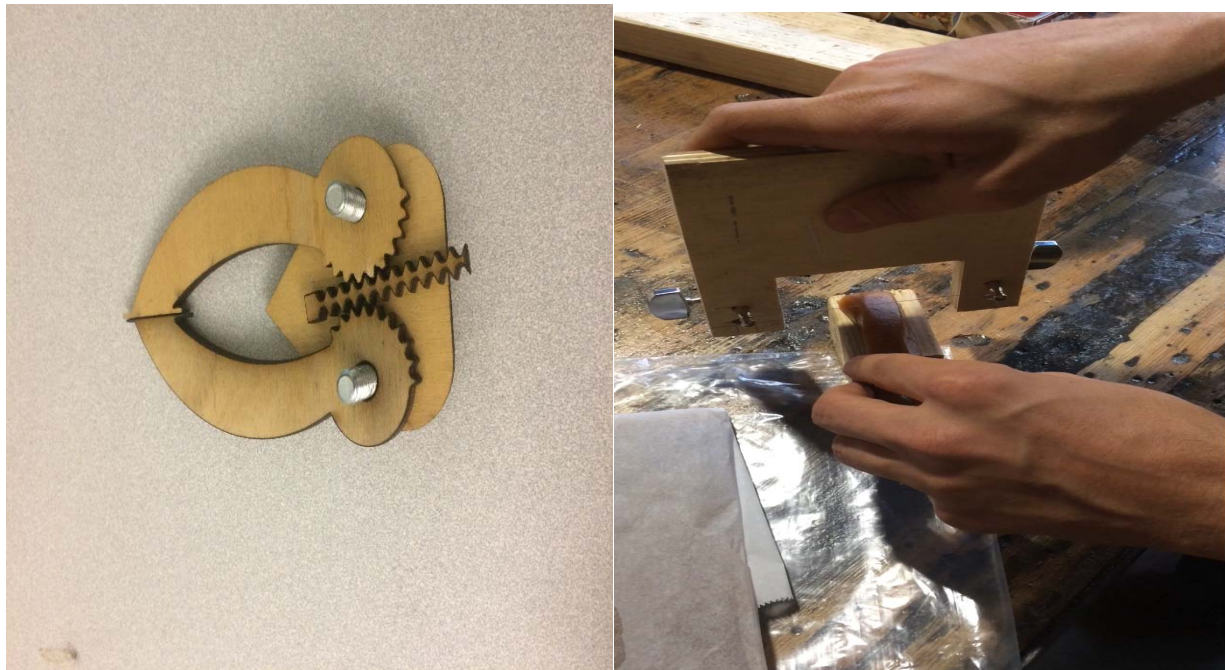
(Left) Claw mechanism testing prototype made from a laser cutter and (Right) wire cutting prototype to test cutting of the caramel.
